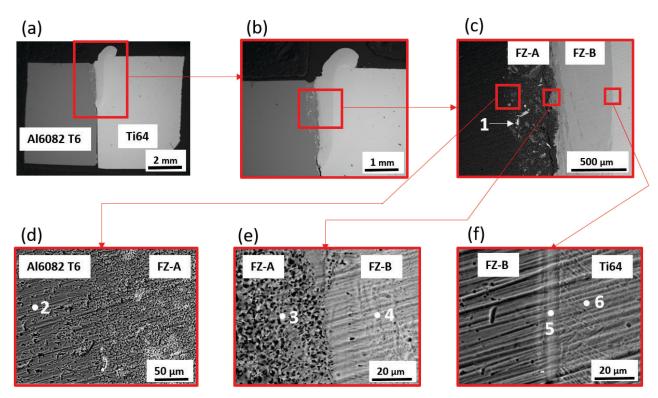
Cross-sectional SEM images of the welded joint: (a) both jointed plates; (b) weld seam as a whole; (c) part of the weld seam; (d) interface Al6082-T6 / fusion zone-A; (e) interface fusion zone-A / fusion zone-B; (f) interface fusion zone-B / Ti64.
